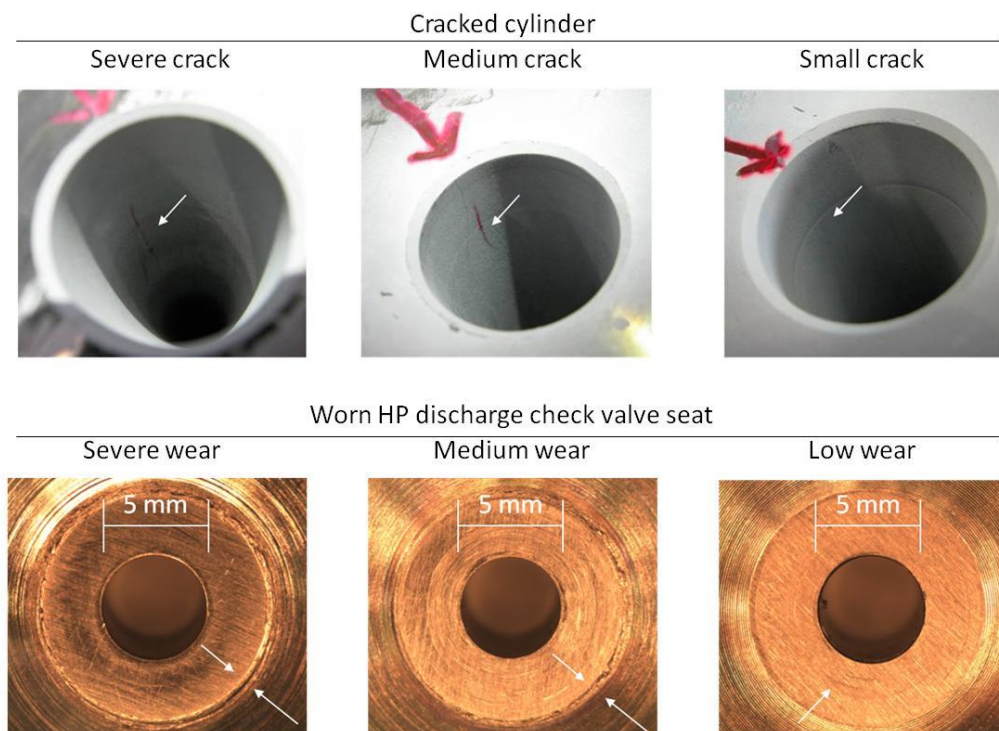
Cracks on cylinders revealed by the dye penetrant analysis (top) and damaged surfaces of HP discharge check valve seats (bottom)
